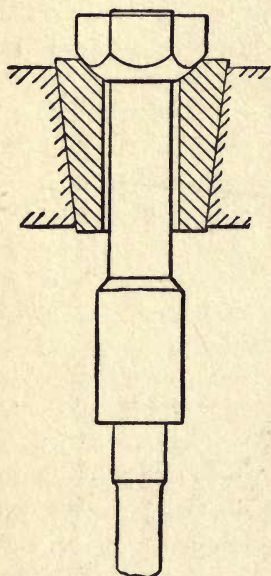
Ball Seating for Tension Specimens with Screwed Ends.
